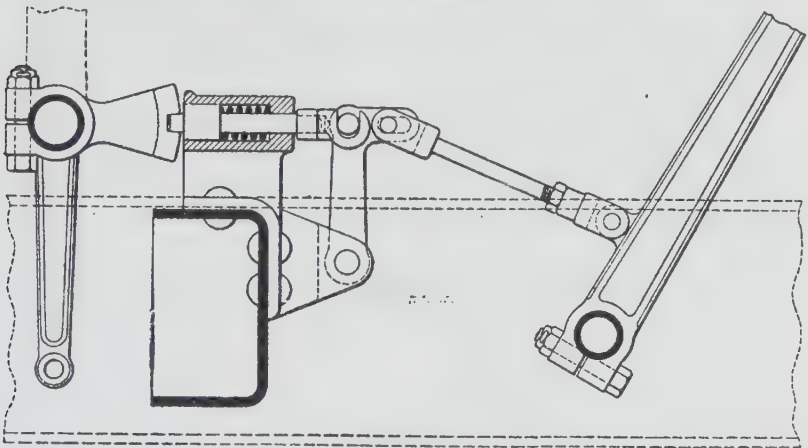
CLUTCH AND GEAR INTERLOCK.
